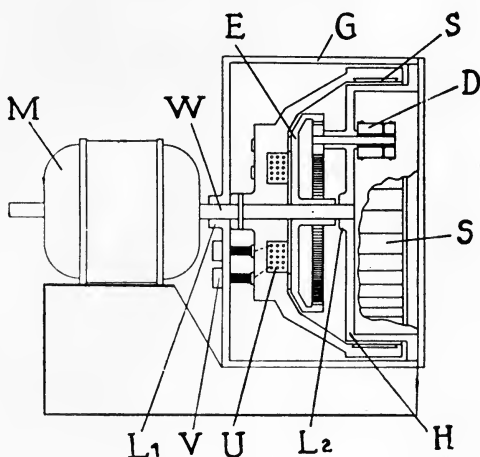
Cross-section of new type of camera, showing magnetic coupling of mirror drum with motor shaft.
